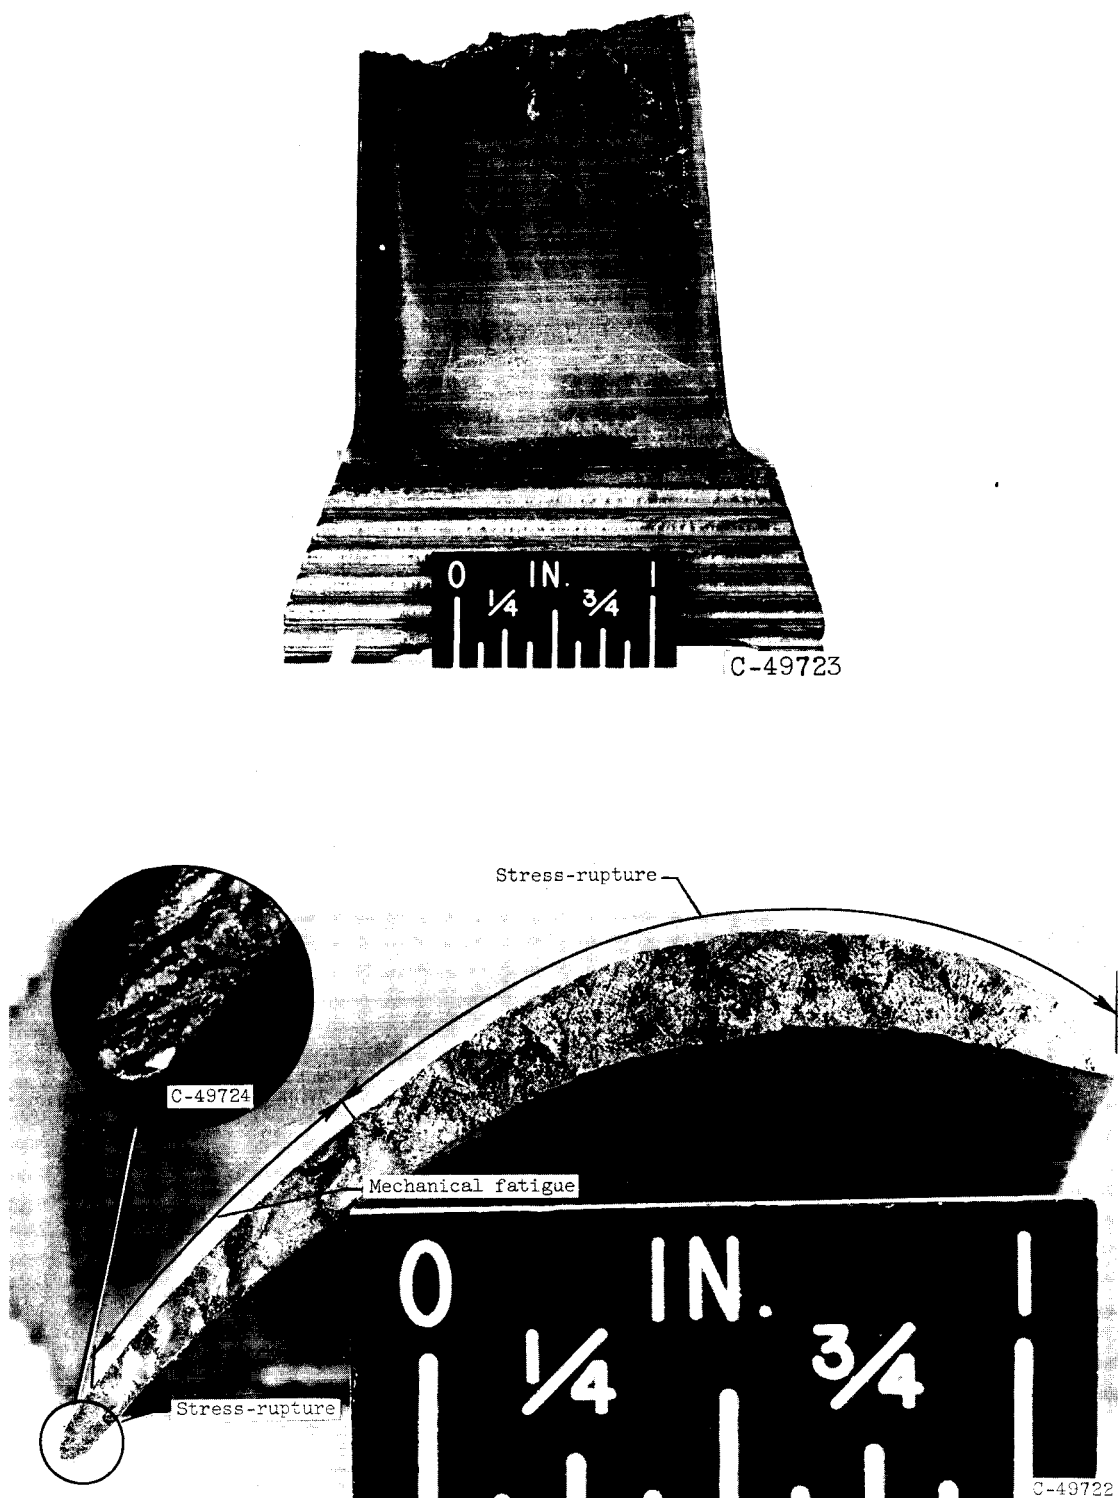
Typical stress-rupture and mechanical-fatigue fracture. Air-melted diffusion-heat-treated group-6 bucket operated for 74.5 hours.
